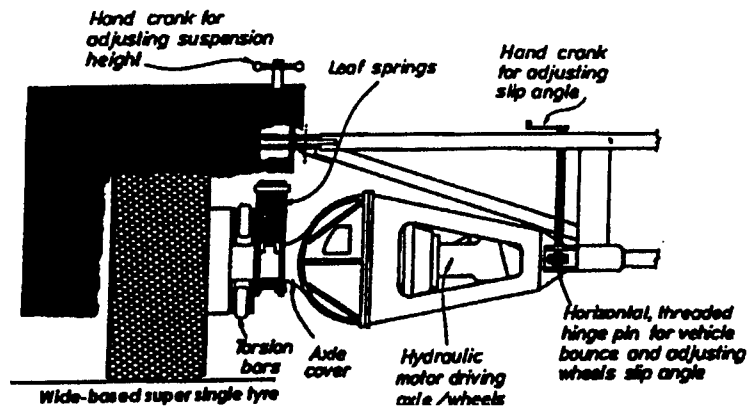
Elevation view of a SLAVE vehicle (steel suspension).
